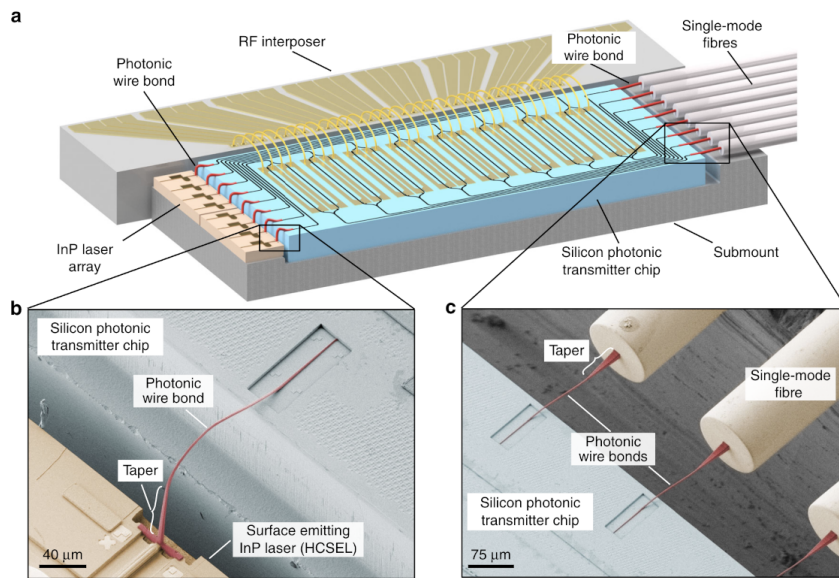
Hybrid assembly for co-packaging InP laser array and silicon photonic transmitter using photonic wirebonds. Figure adapted from [21].
